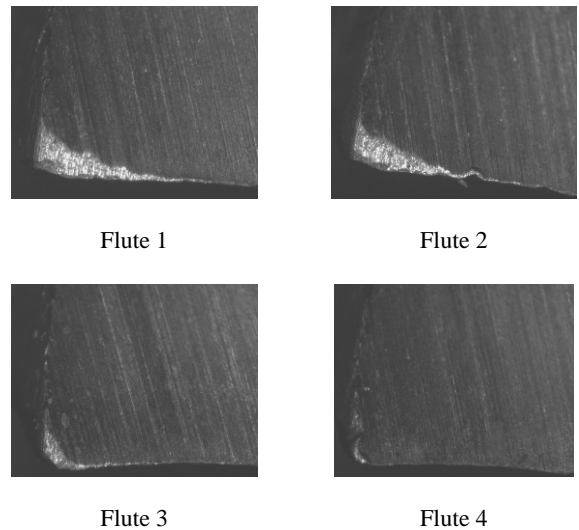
Flank wear dry cutting at cutting speed of 10 m/min for 90 min
